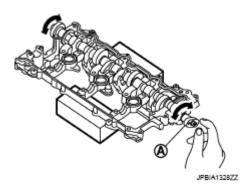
Moving Control Shaft To Small Stopper Courtesy of NISSAN MOTOR CO., U.S.A.
